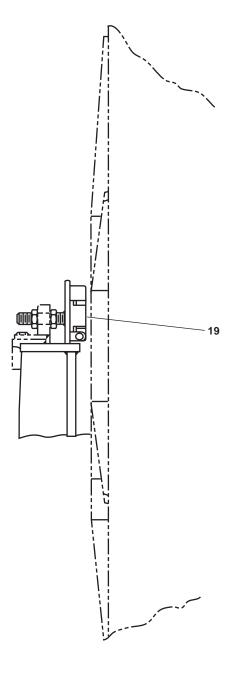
Towing Machine, Double Drum (Sheet 3 of 11)
